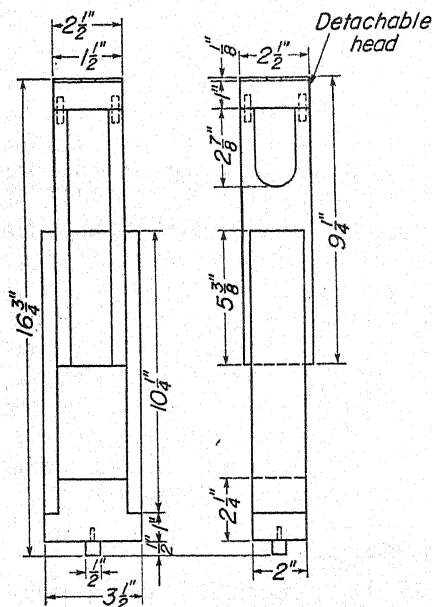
Bar for Calibrating Deformation-Under-Load Testing Machine.
